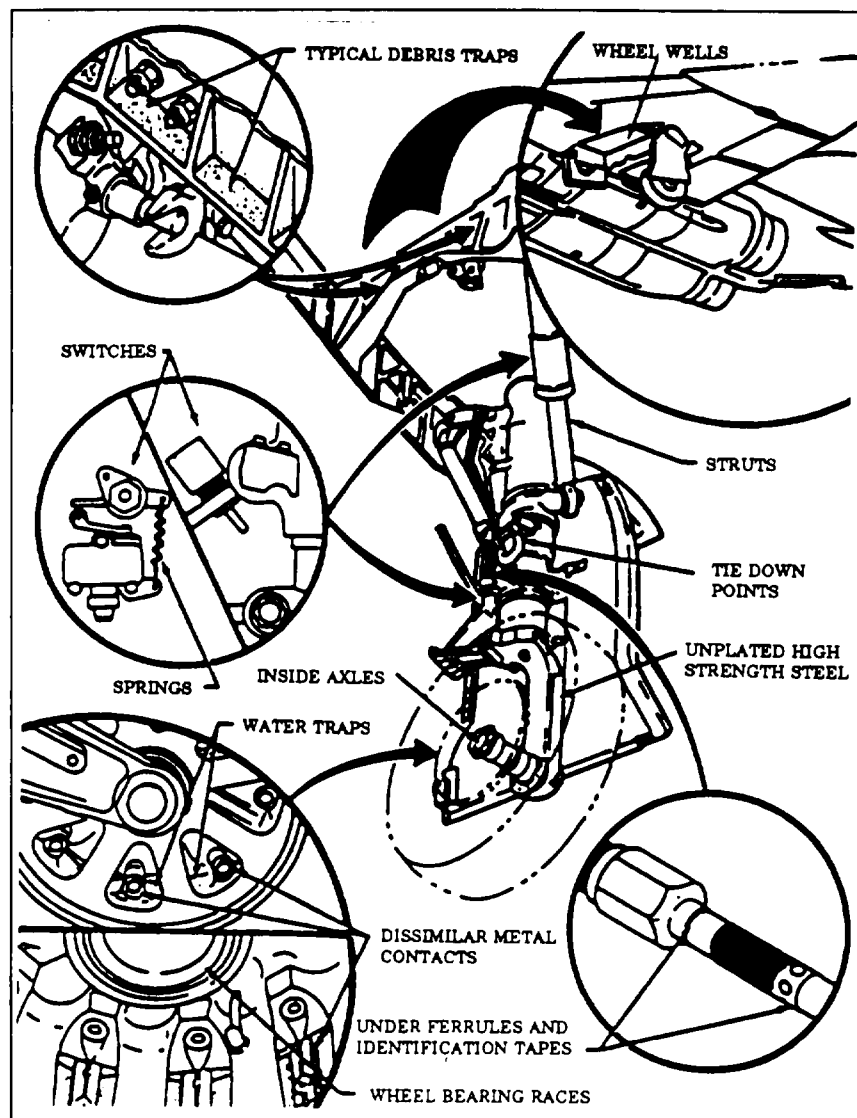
LANDING GEAR AND WHEEL CORROSION POINTS
